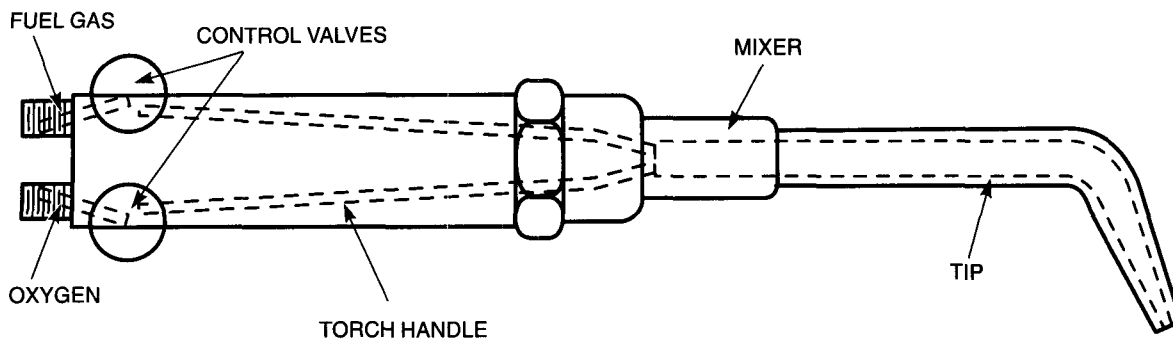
Schematic Drawing of the Basic Parts of a Welding Torch
